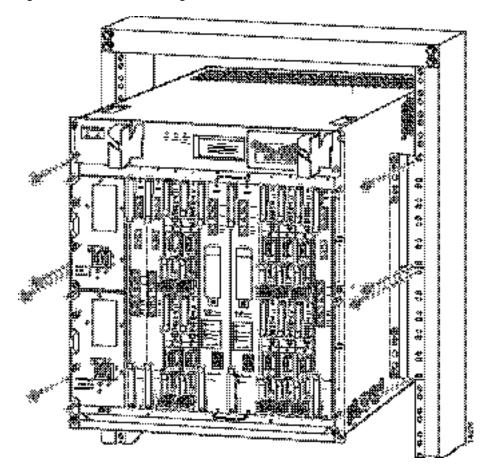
Center-Mounting the Cisco 6400 Chassis in a 23-Inch Rack
